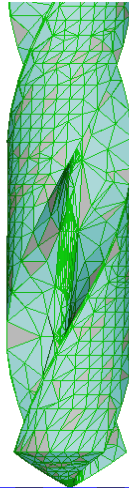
The mesh model of 110° point angle drill bit and workpiece.
